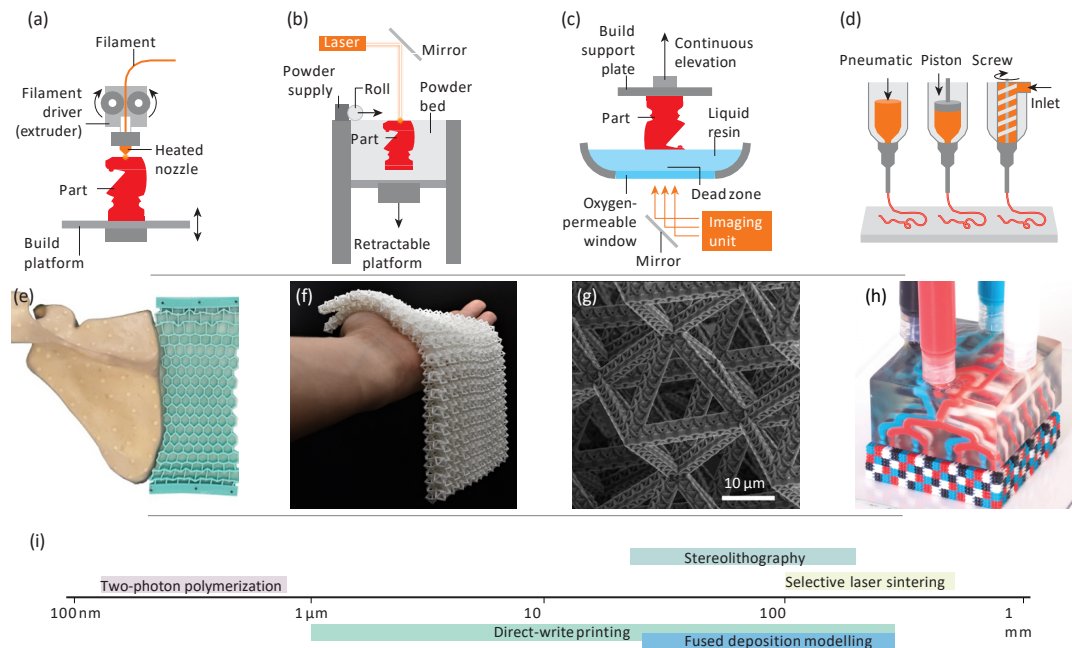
(a–d) Typical additive manufacturing techniques and 3D-printed mechanical metamaterials: (a) fused deposition modeling; (b) selective laser sintering; (c) resin printing (e.g., stereolithography and two-photon polymerization); (d) direct-write printing [84]. (e–h) 3D-printed mechanical metamaterials fabricated by: (e) fused deposition modeling [92], (f) selective laser sintering [46], (g) two-photon polymerization [93], and (h) direct-write printing [94]. (i) Minimum size ranges of patterned features produced by different additive manufacturing techniques [84].
